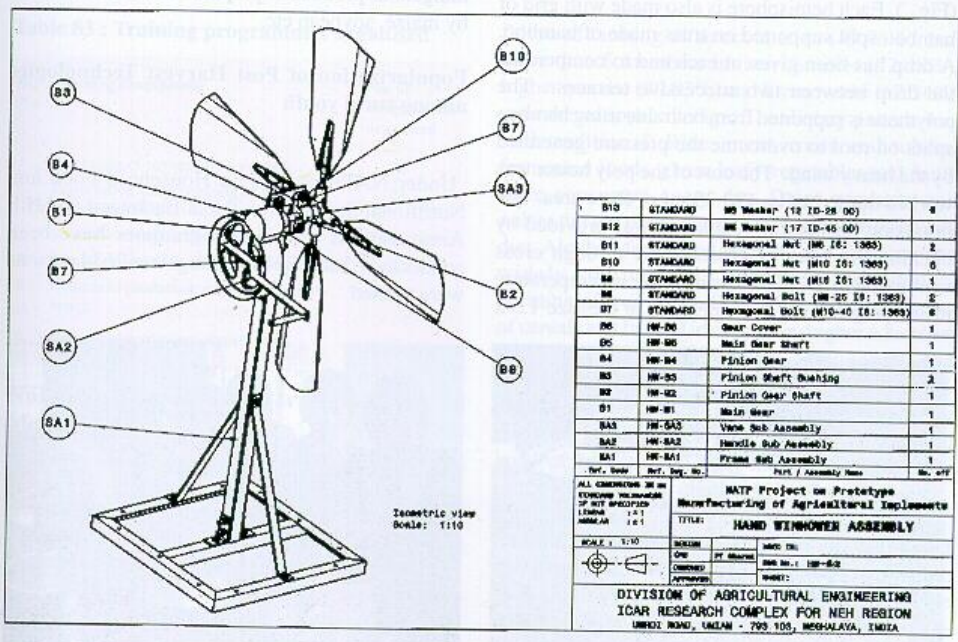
Manufacturing Drawing of Hand Winnower (Assembled)
